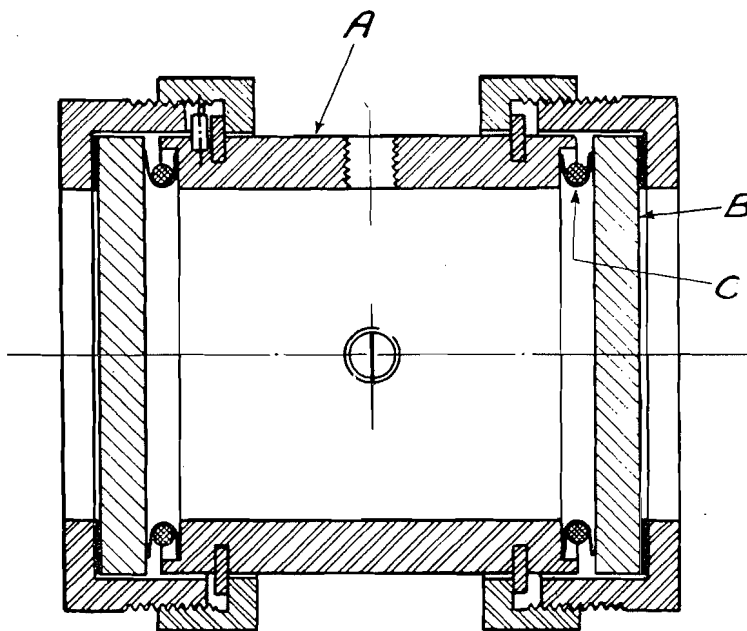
Section of the Perkin-Elmer 5 cm. tantalum-clad steel cell.
